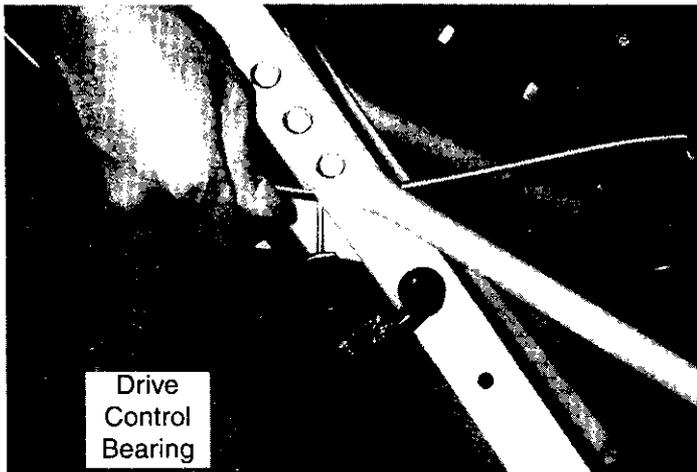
Insert the rod at the bottom of the Wheel Drive Lever and secure with a cotter pin.
